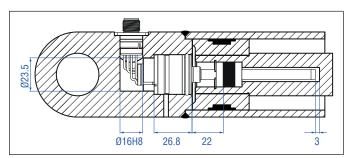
Example of In-Cylinder assembly with M12 connector system
